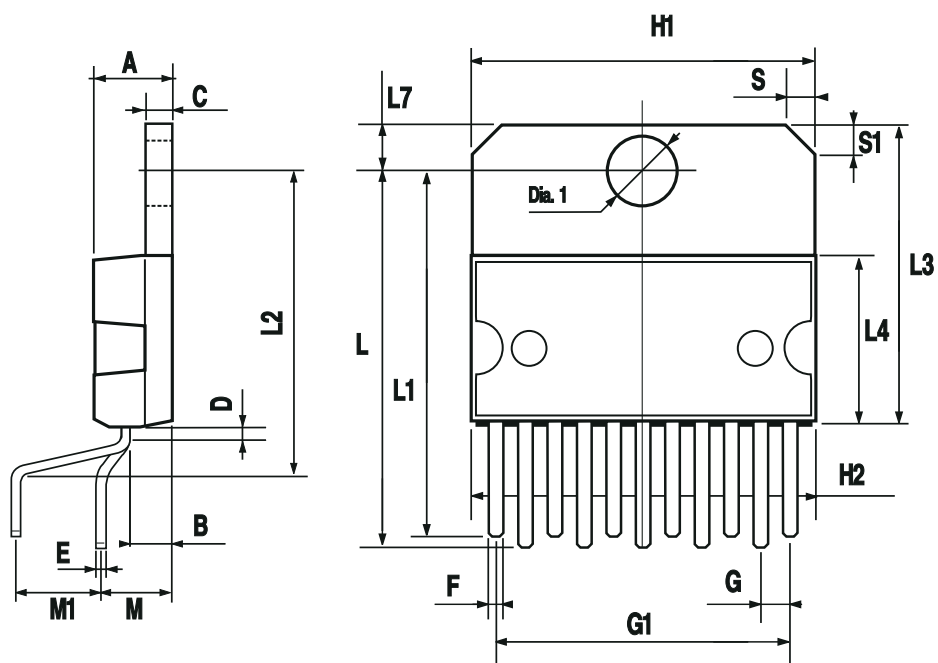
Multiwatt 11 Mechanical Data &amp; Package Dimensions
